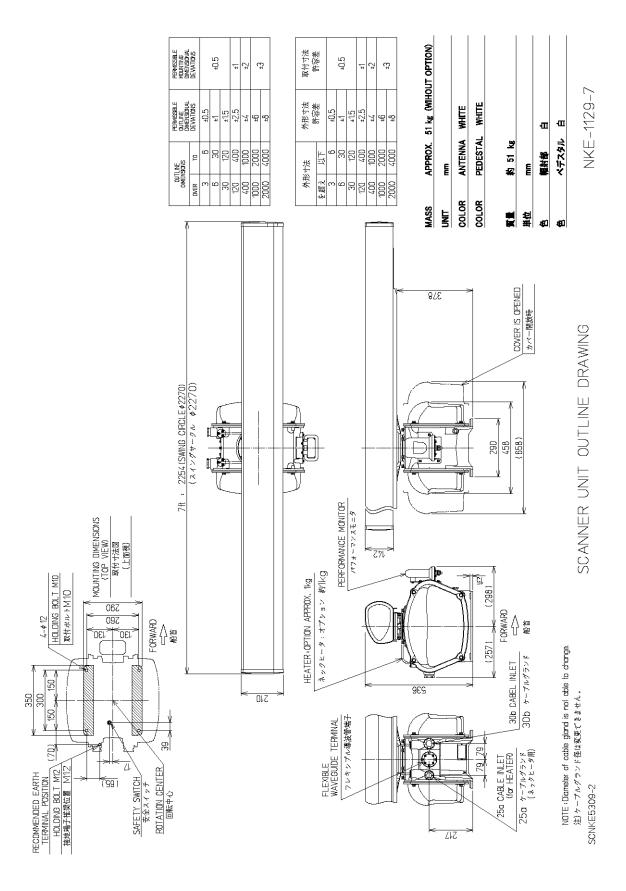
Outline Drawing of Scanner Unit, Type NKE-1129-7
